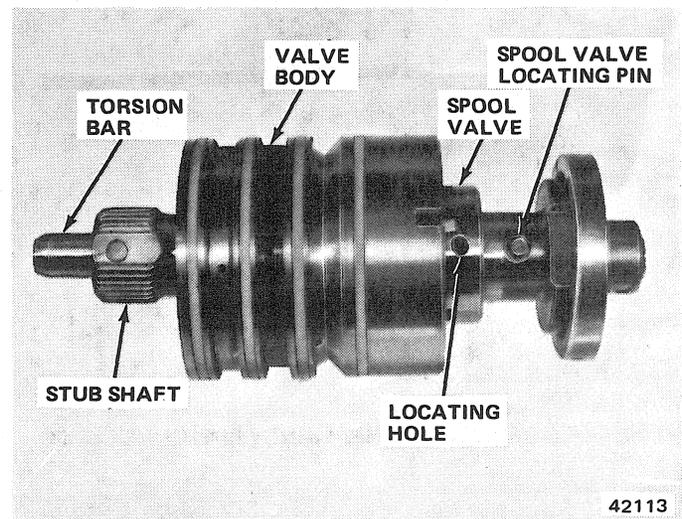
L-29 Valve Body and Spool Valve Disassembly
